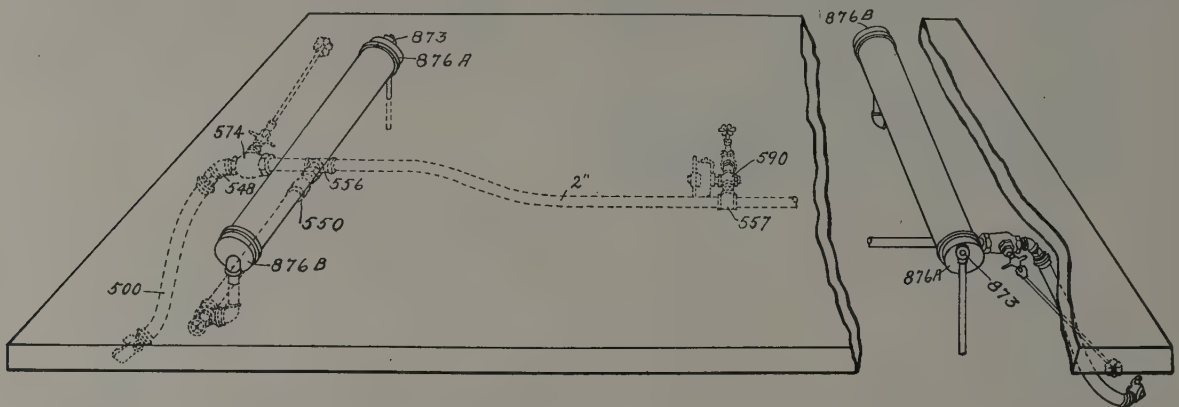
Piping Arrangement for Gold Improved Storage Heaters. Gold Car Heating & Lighting Company.
